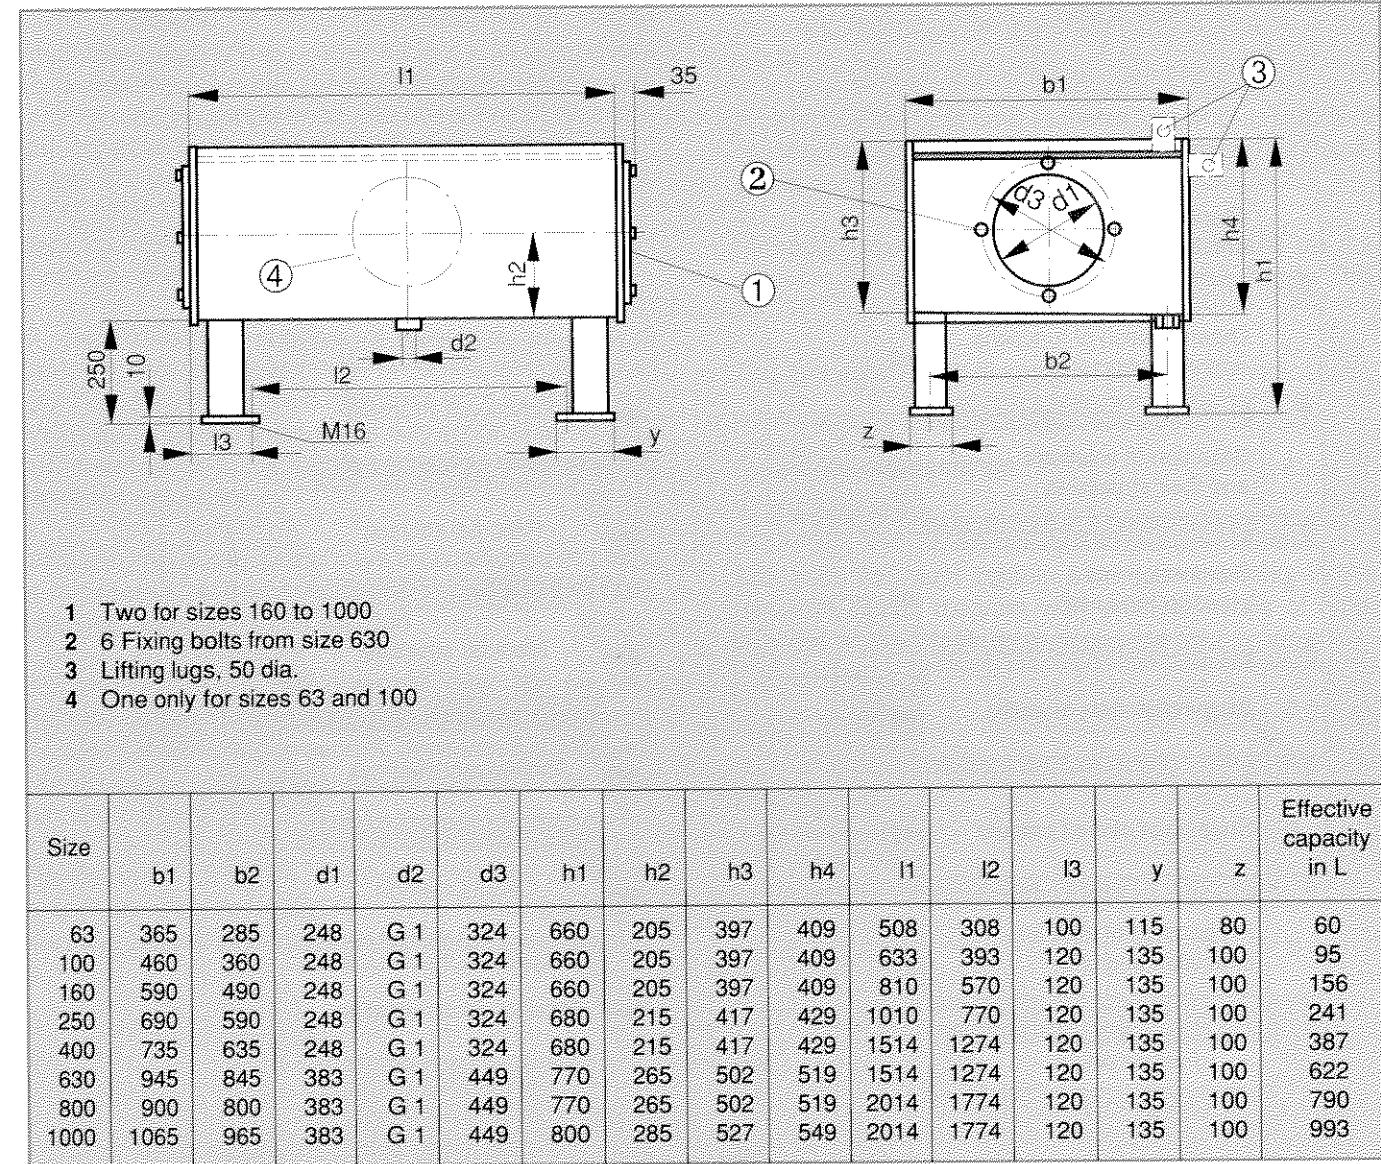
Principal dimensions of rectangular oil tanks in steel similar to DIN 24 339
